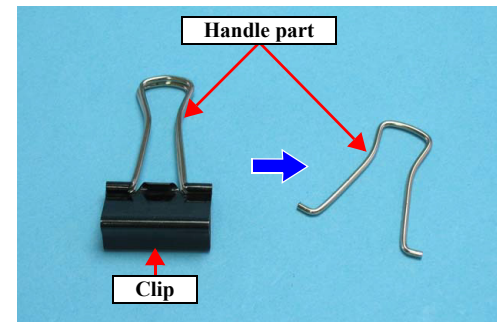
Method for making CSIC Board Removal Tool (1)
